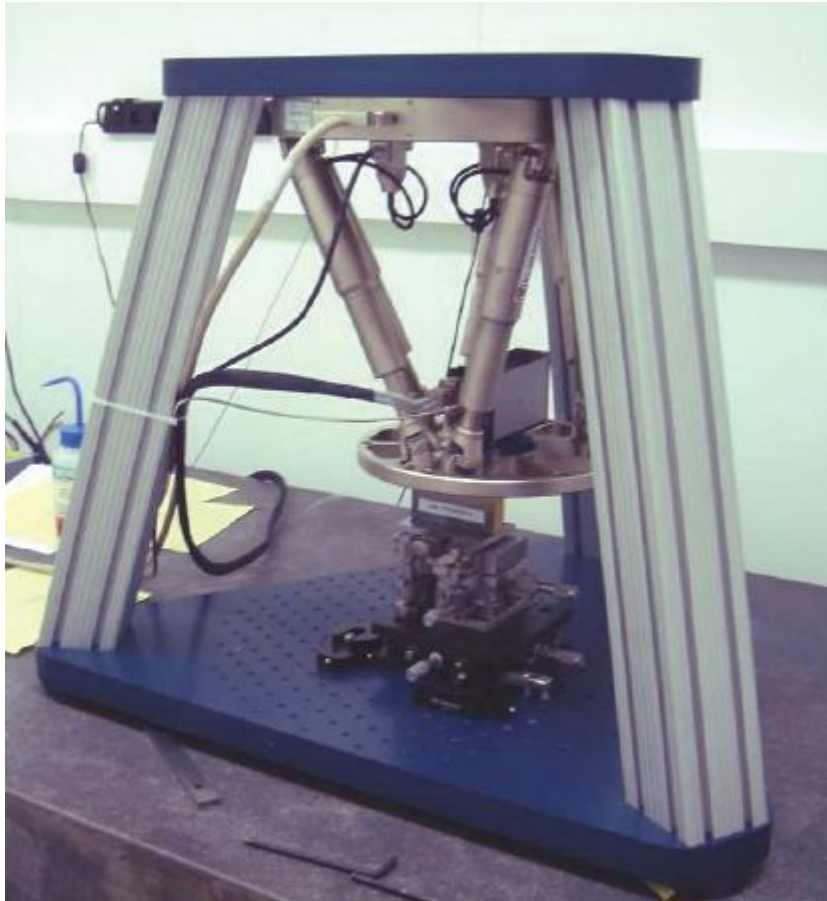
Geometry Measuring Machine (GEMM) [Kim2004]
